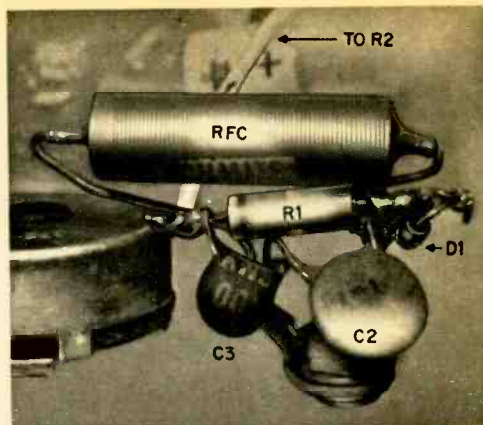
RF output meter parts are located on rear chassis apron near regeneration control R106 (left). Don't apply excessive heat when soldering to D1.
